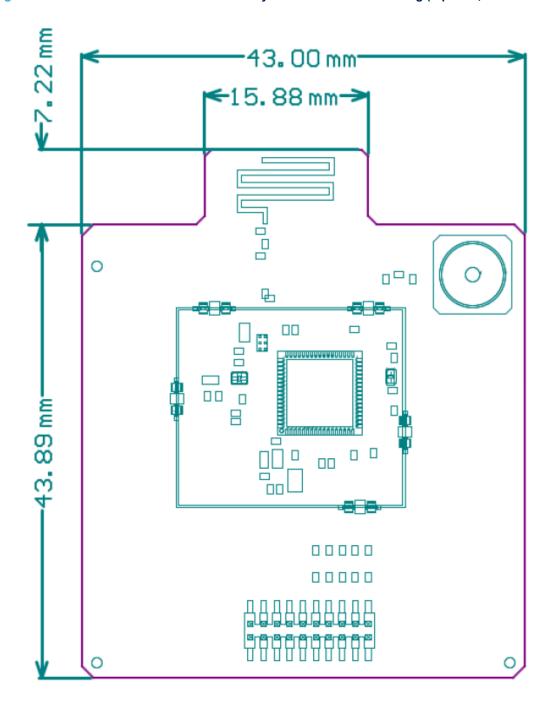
STM32WBA65I-DK1 MB2143 Discovery board mechanical drawing (top view, in millimeters)
